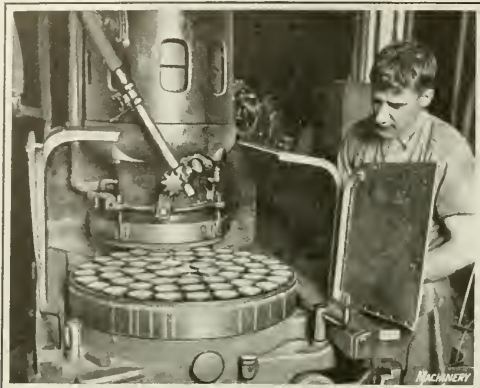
Vertical-spindle Grinding Machine surface-grinding the Sides of Ball-bearing Rings
